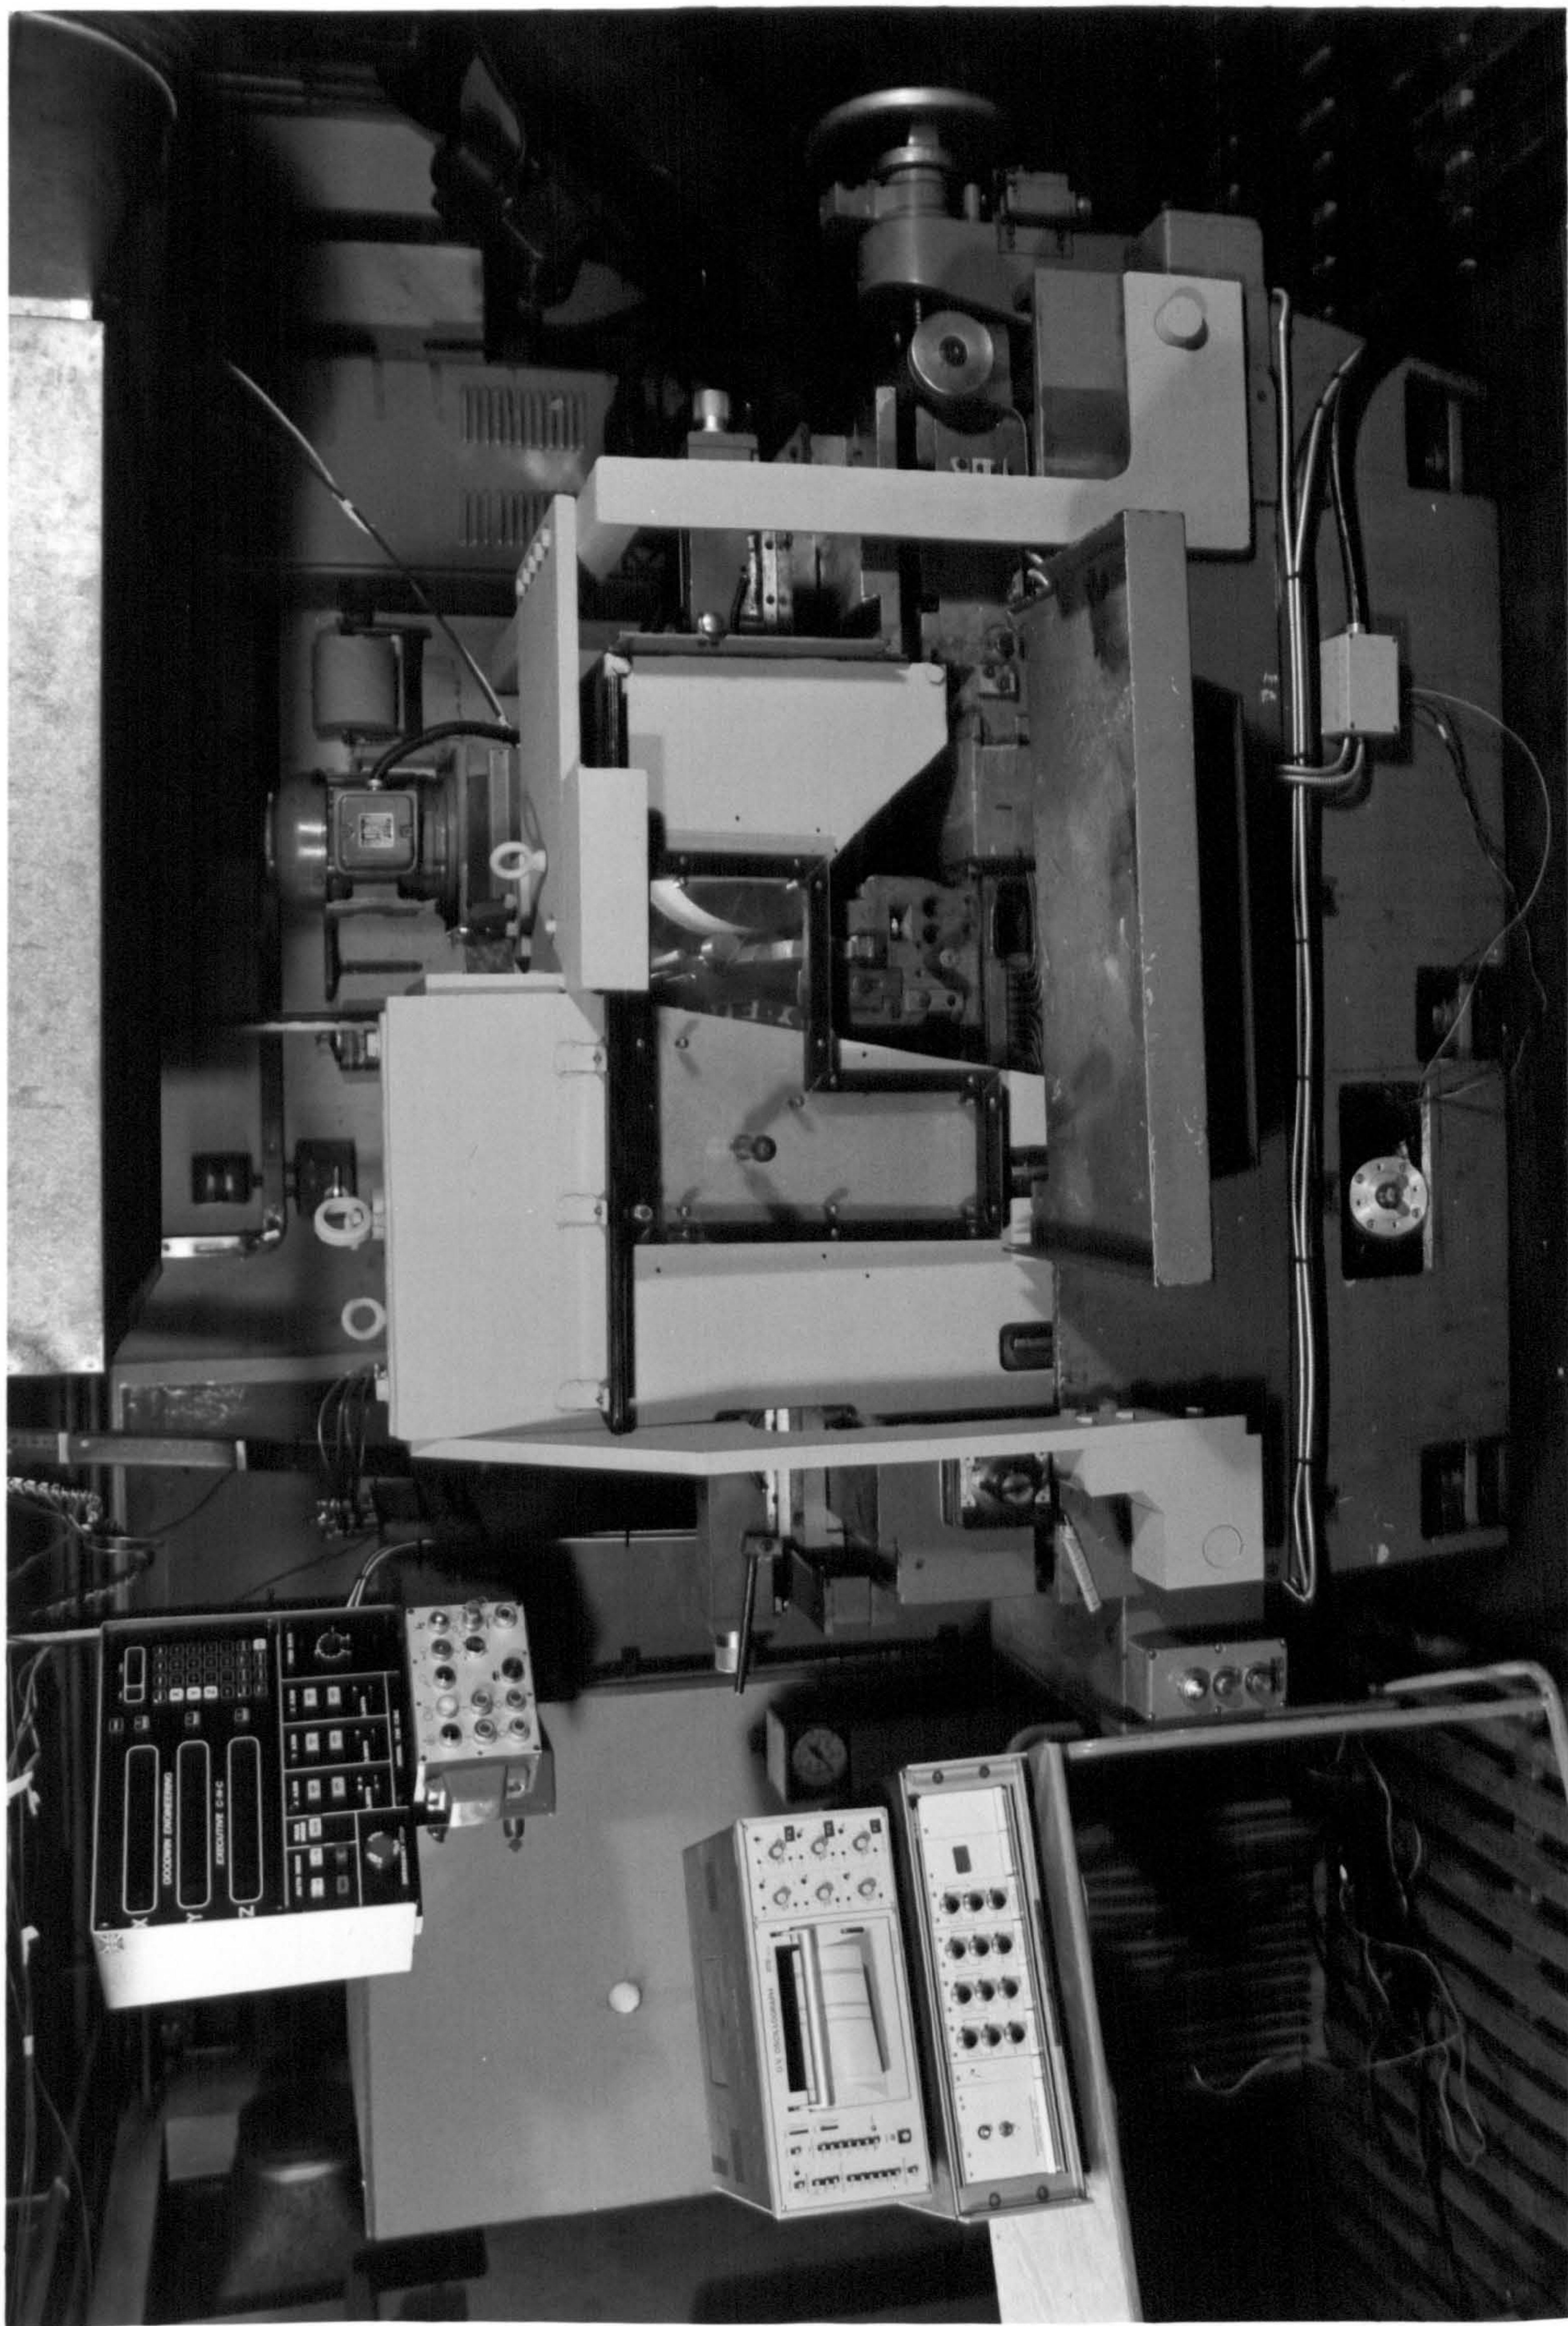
MANIFOLD DELIVERING A UNIFORM SHEET OF COOLANT ACROSS A WIDE GRINDING WHEEL FACE WIDTH.
